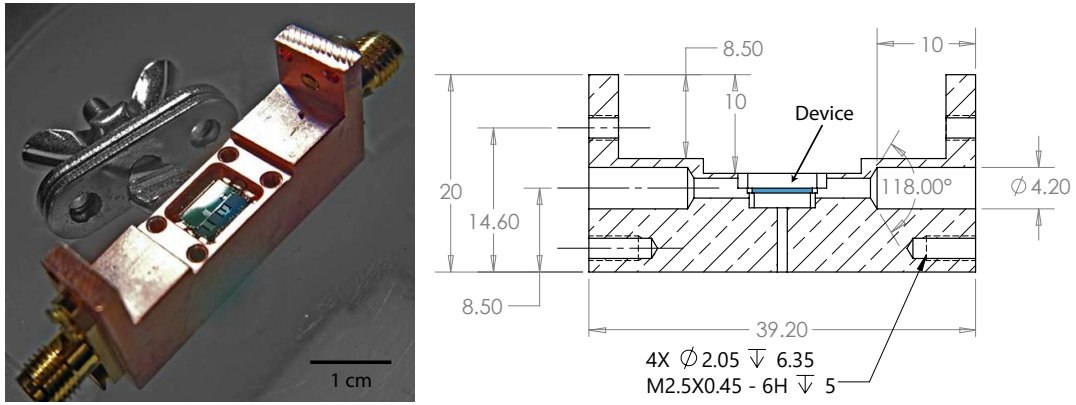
Sample holder with the initial device (left) and technical drawing of a longitudinal cut through the sample holder.
